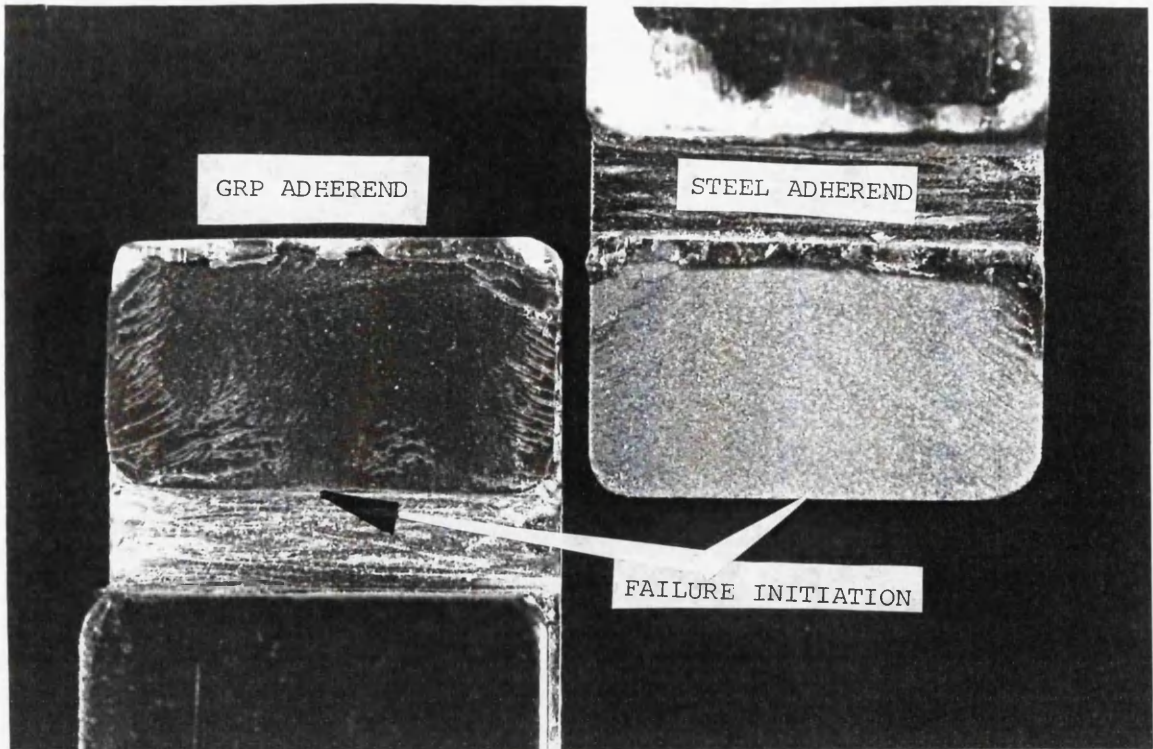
FRACTURED SURFACES OF LAP SHEAR SPECIMEN (STEEL/GRP)
